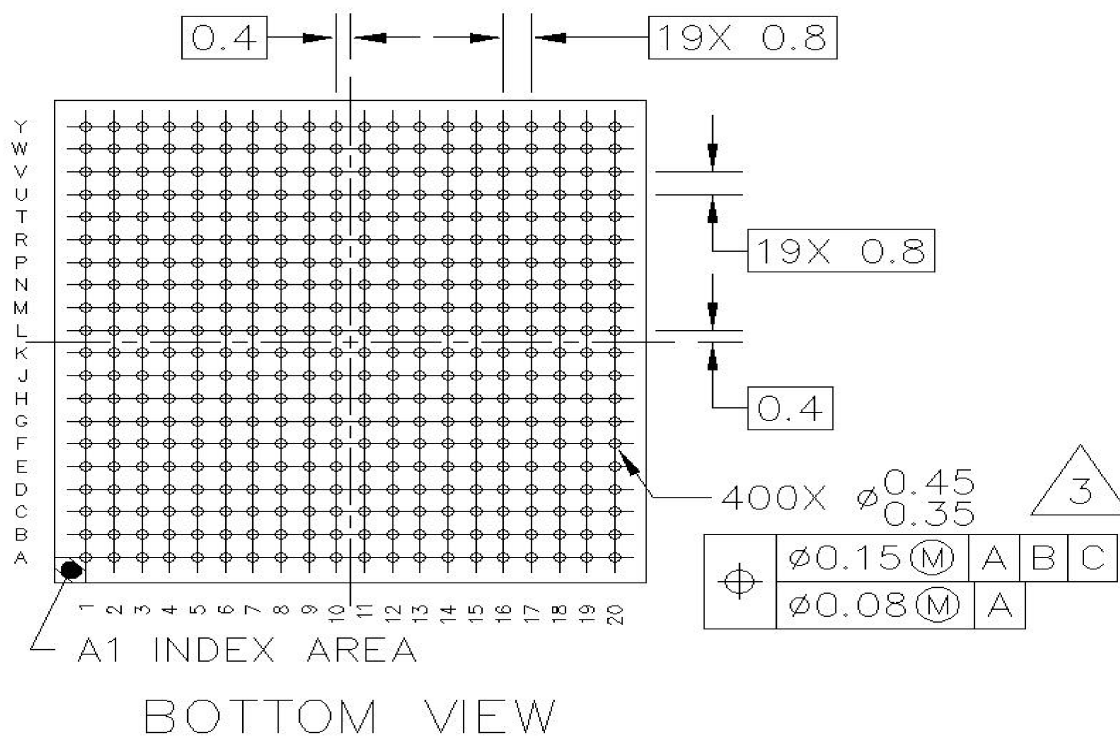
400 MAPBGA 17x17 mm Package Bottom View
